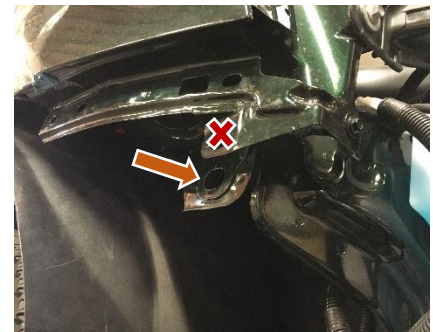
Location of Outer Support Bracket (Passenger Side Shown)
